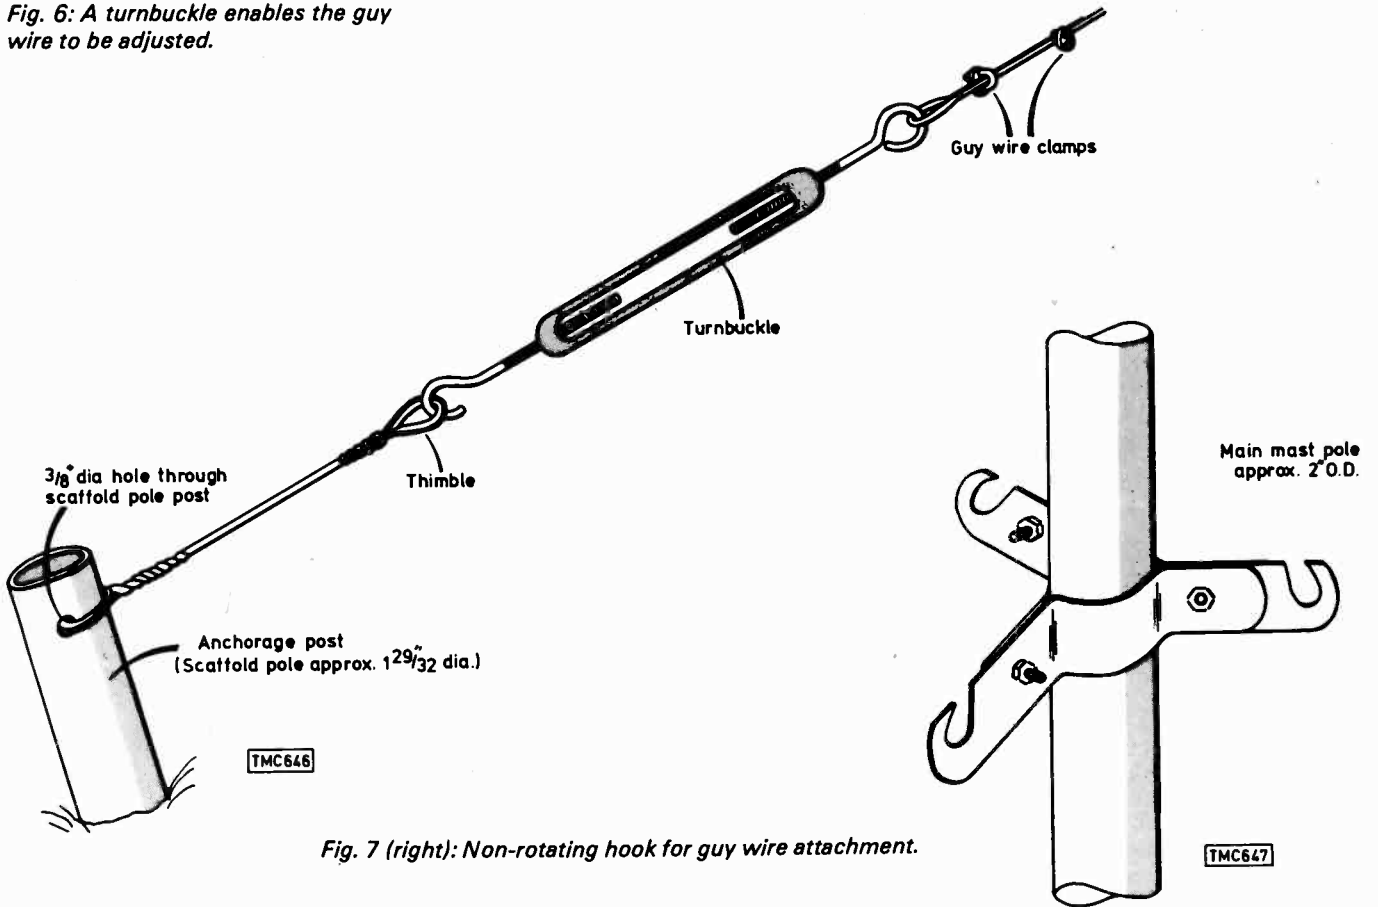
(right): Non-rotating hook for guy wire attachment.
